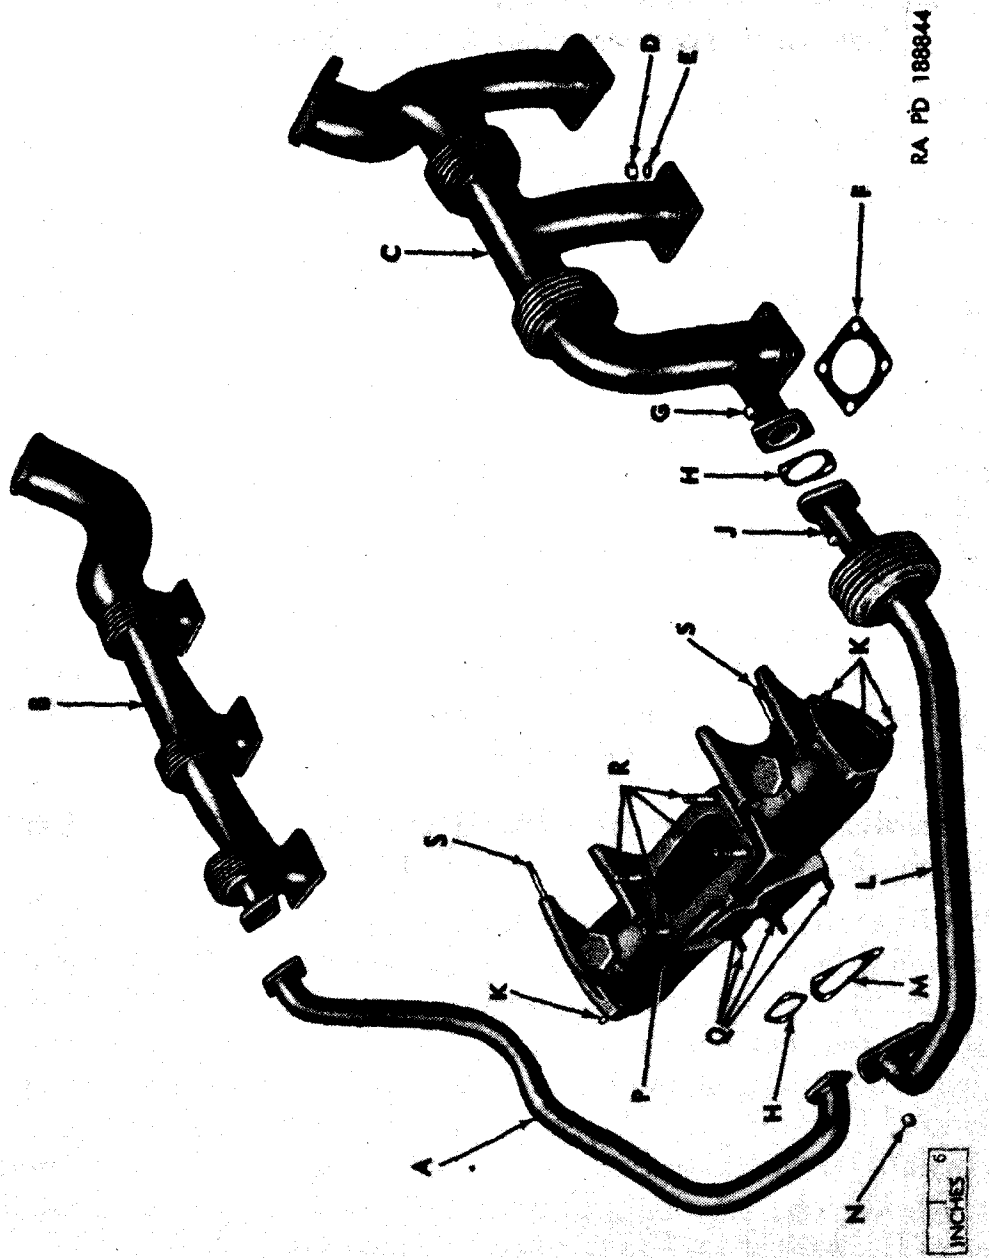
Exhaust manifold assemblies, hotspot intake manifold housing, and hotspot tubes—exploded view.
